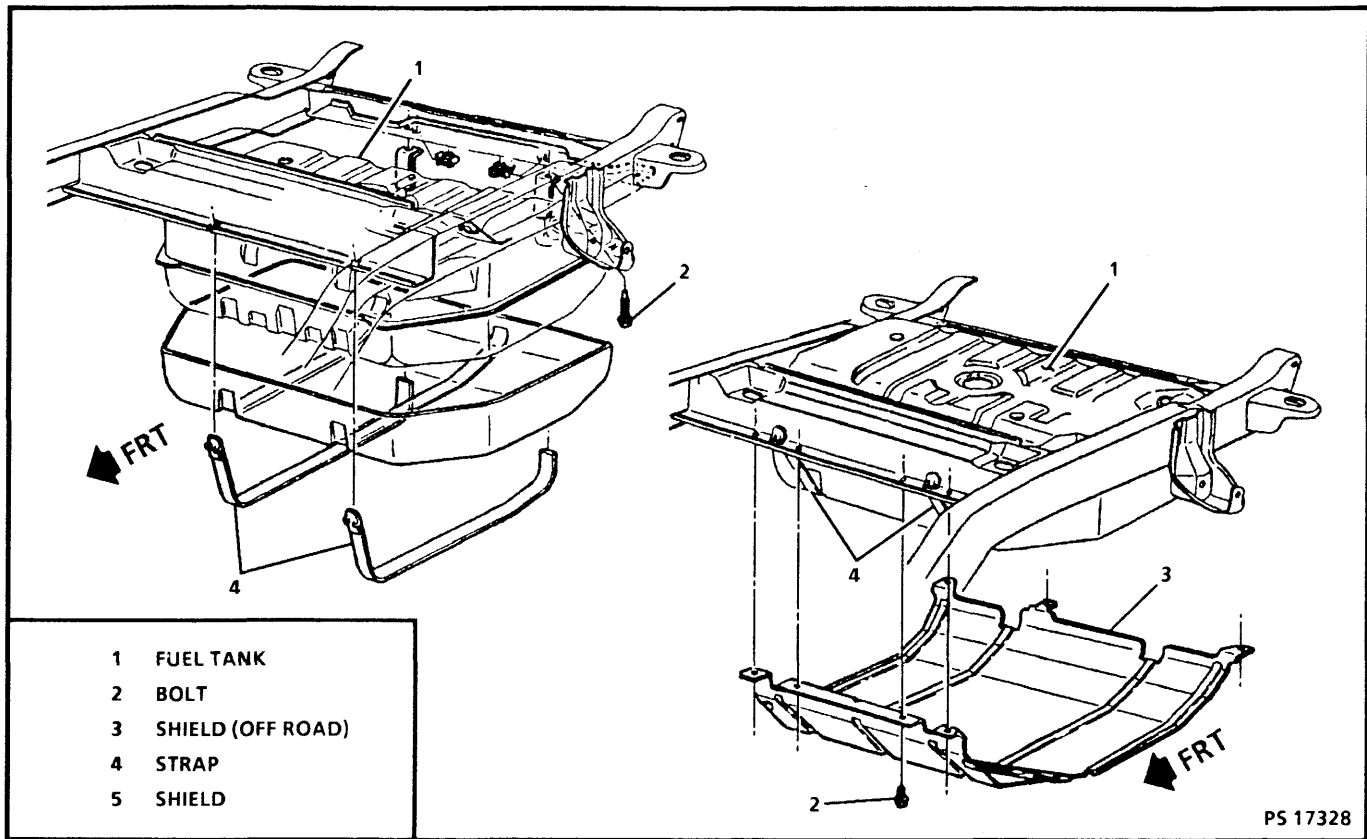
E-8 - Fuel Tank - Yukon/Blazer
